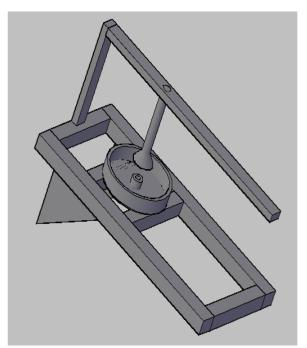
Removal Tool Corn Seed Corn Transformation Machine
